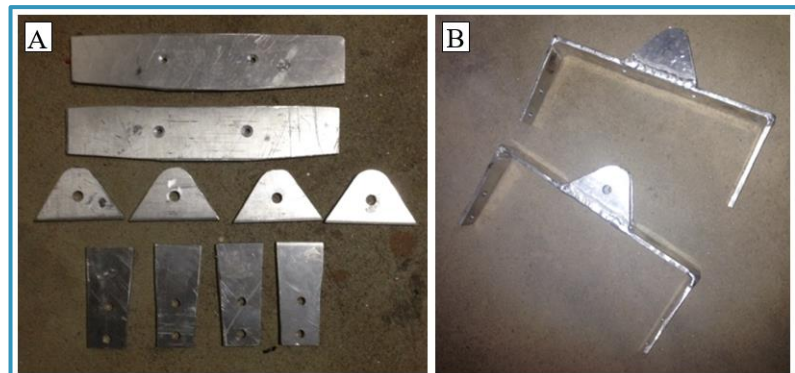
A) Separate hanger sections pre-welding, B) Welded hangers
